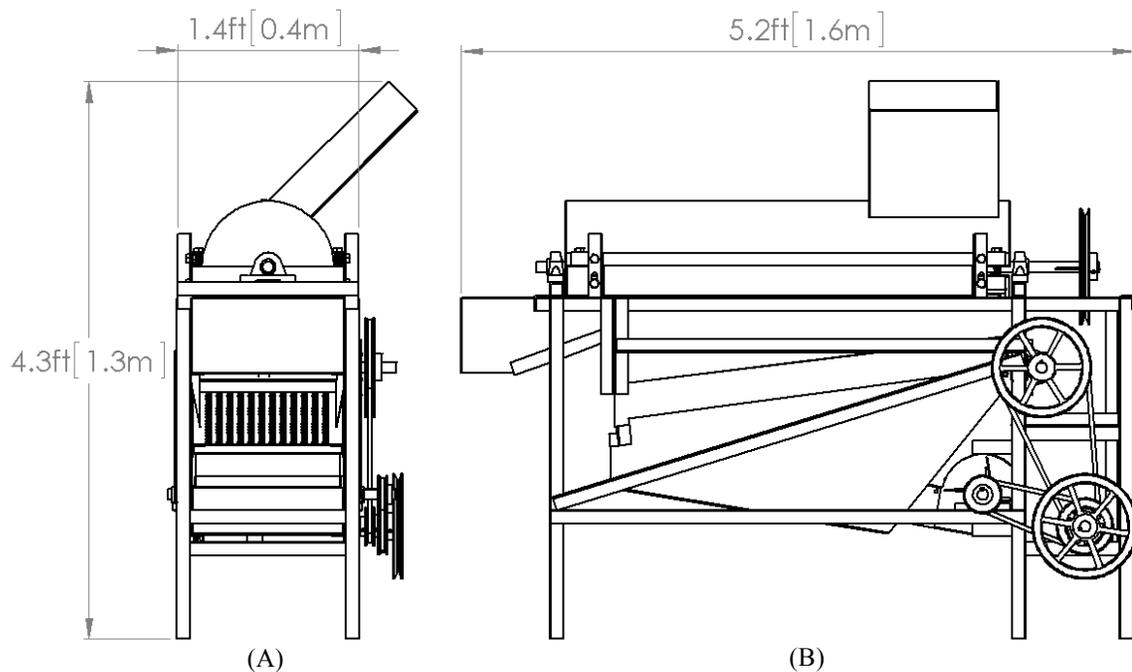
A drawing of (A) the end view and (B) side view of the final thresher design. Source: Author.
